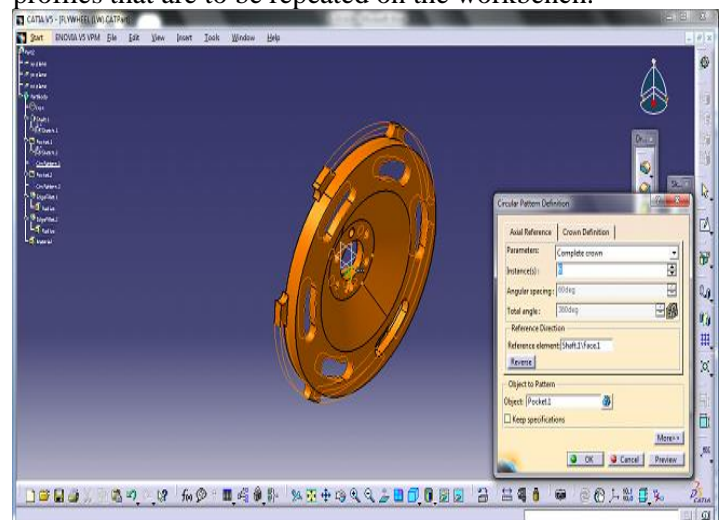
Using Circular Pattern Command for gear tooth formation
